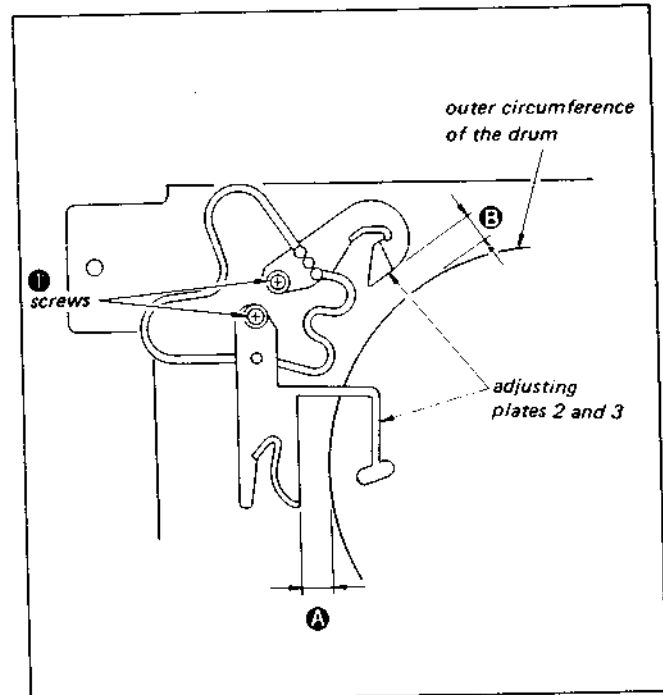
Measurement of the position of adjusting plates 2 and 3
